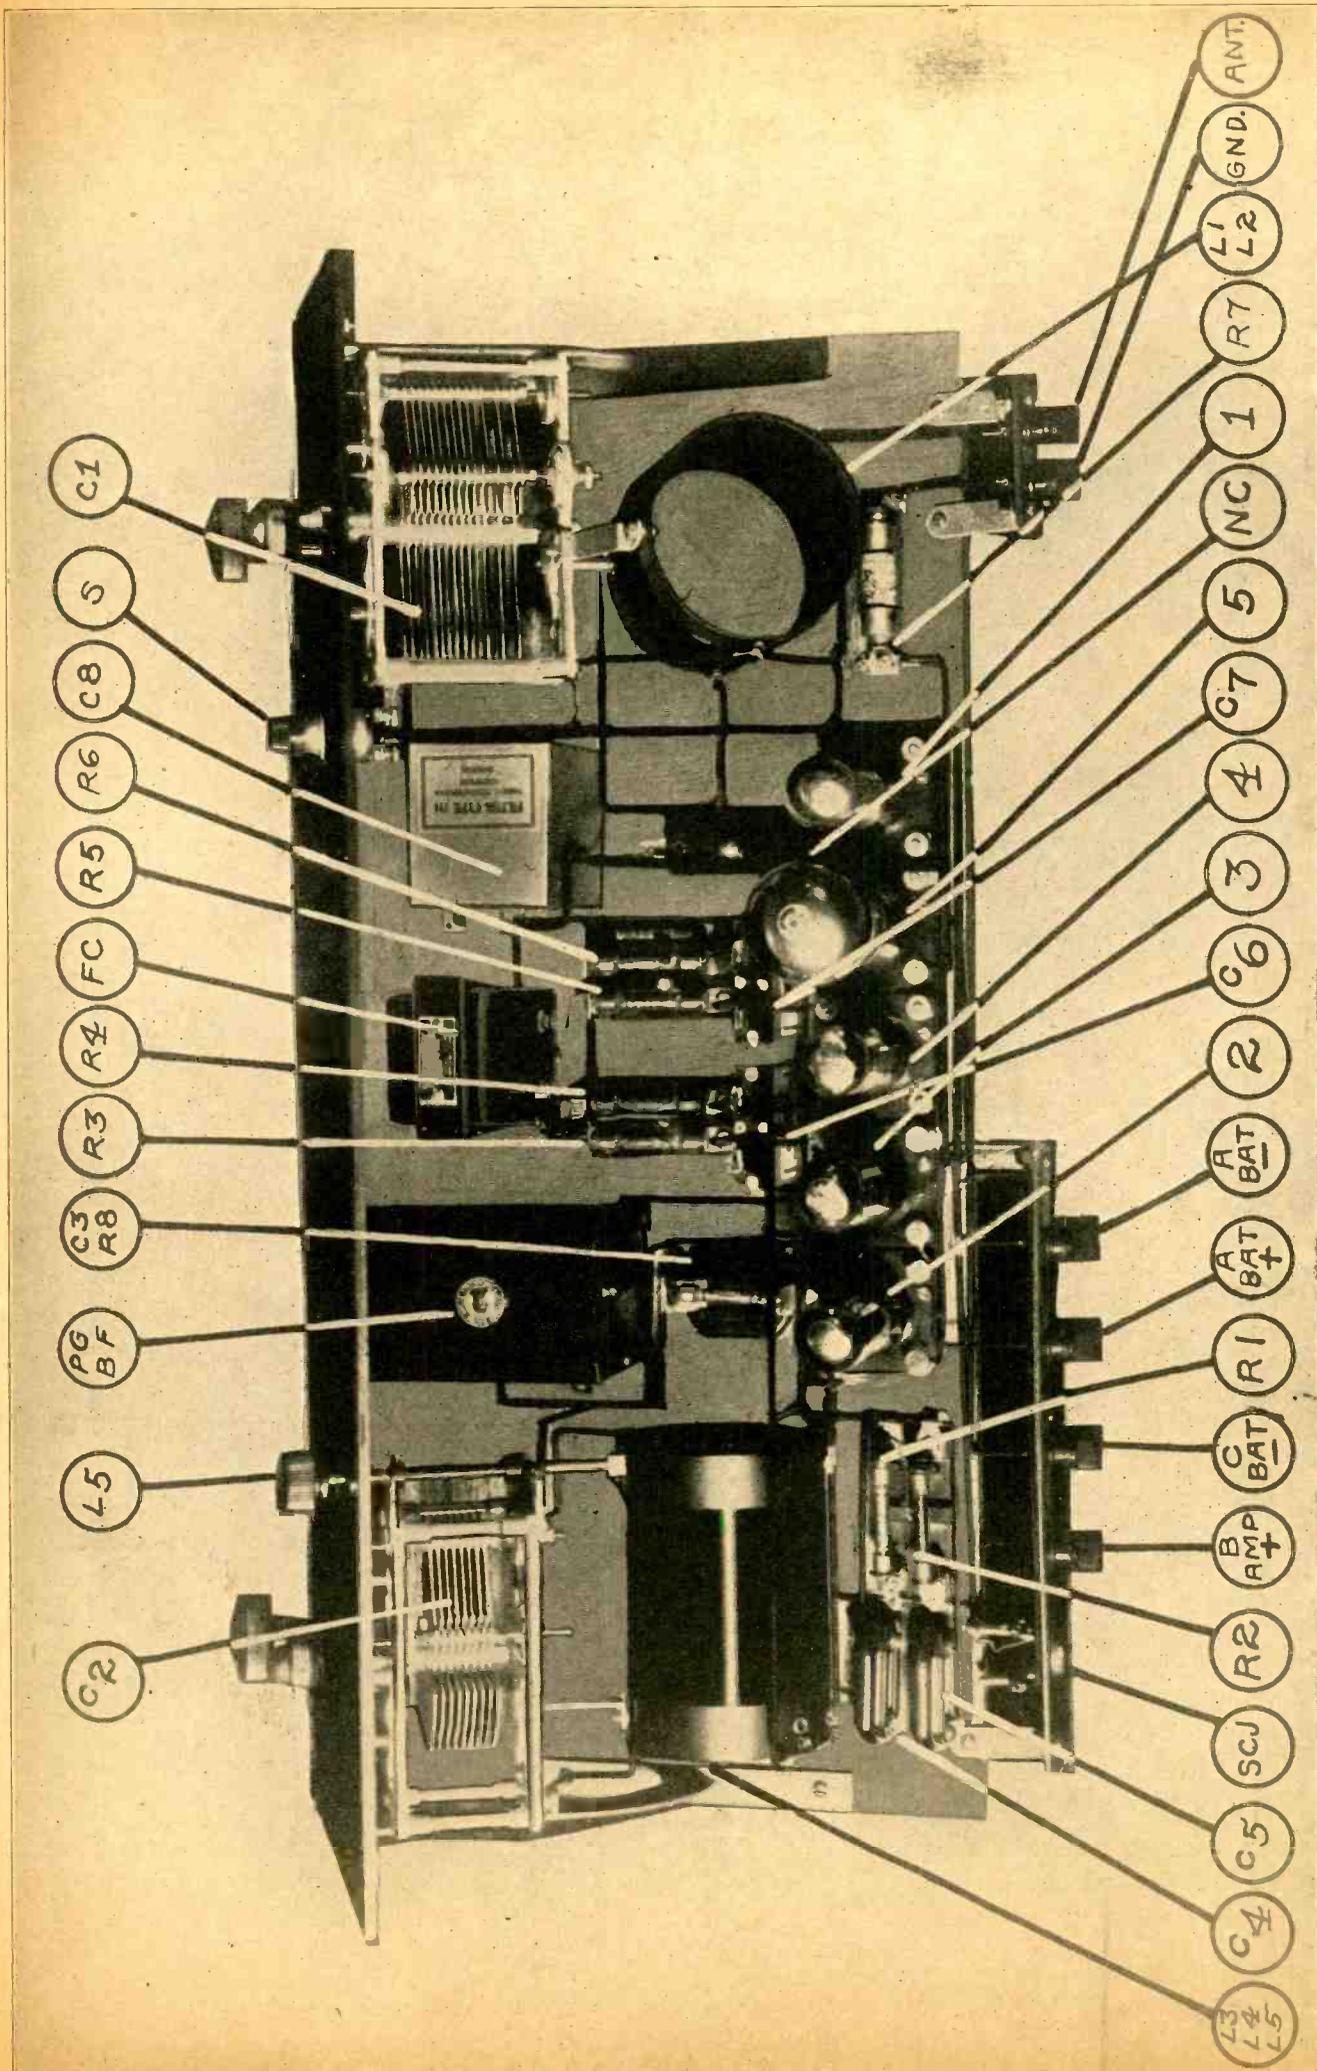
The Location and Identification of the Assembled Parts of the Improved Browning-Drake
